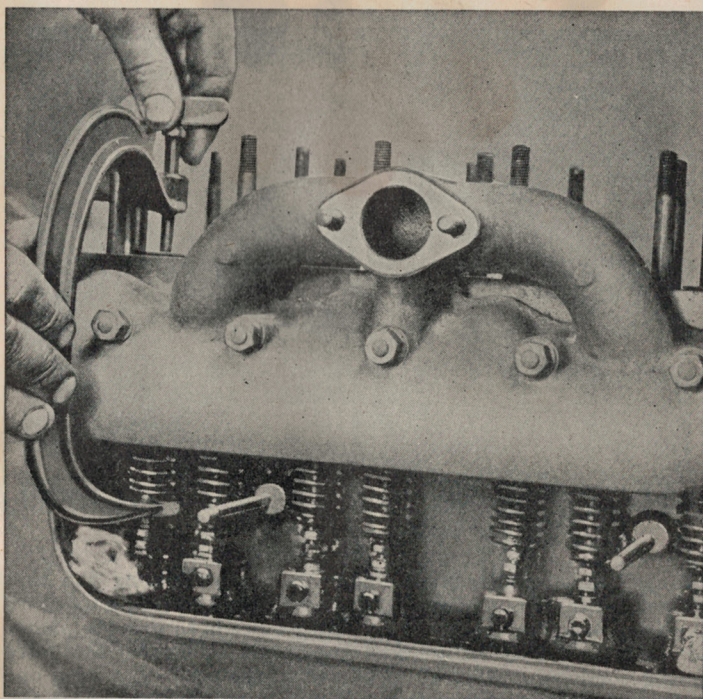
COMPRESSING VALVE SPRINGS WITH VALVE LIFTER IN ORDER TO EFFECT THEIR REMOVAL
